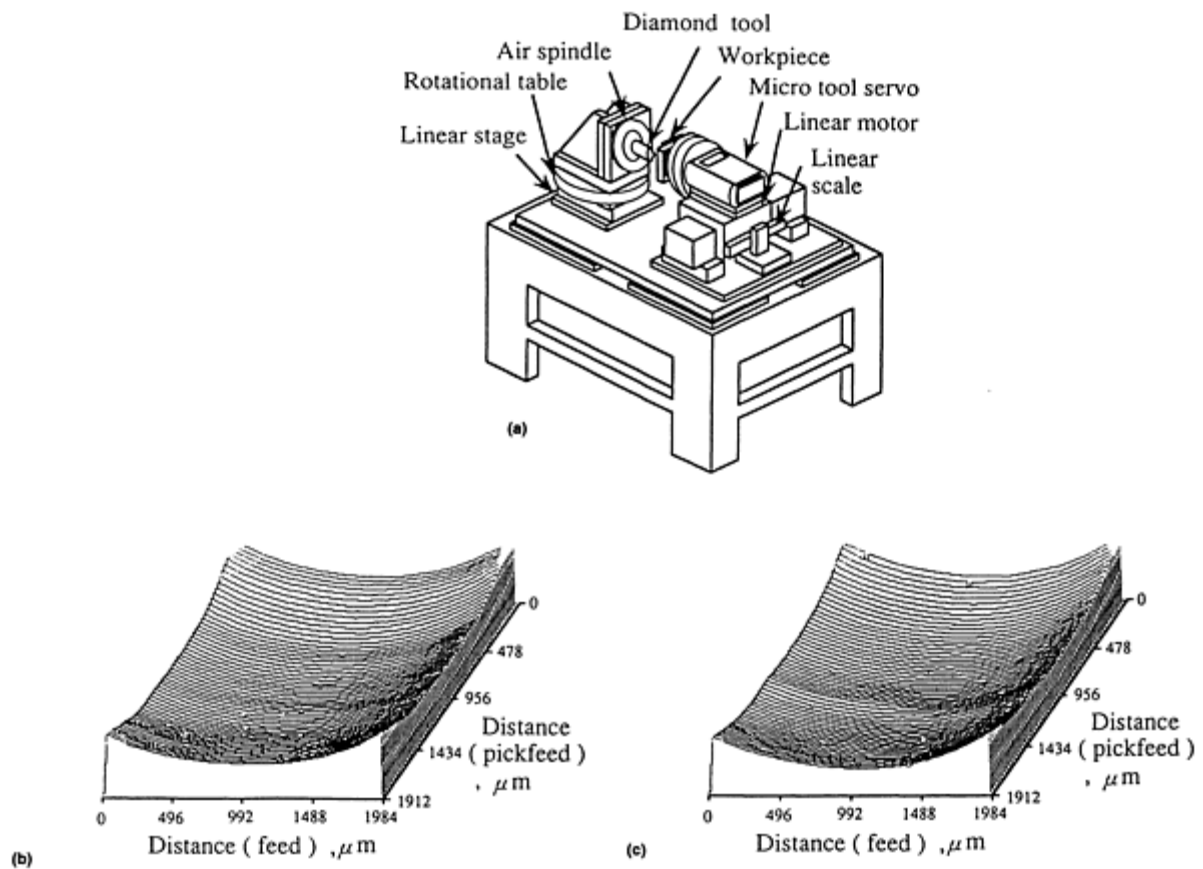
Ultraprecision milling. (a) Ultraprecision machine for manufacturing sculptured surfaces. (b) Paraboloid surface. (c) Toroid surface. Source: Ref 13
